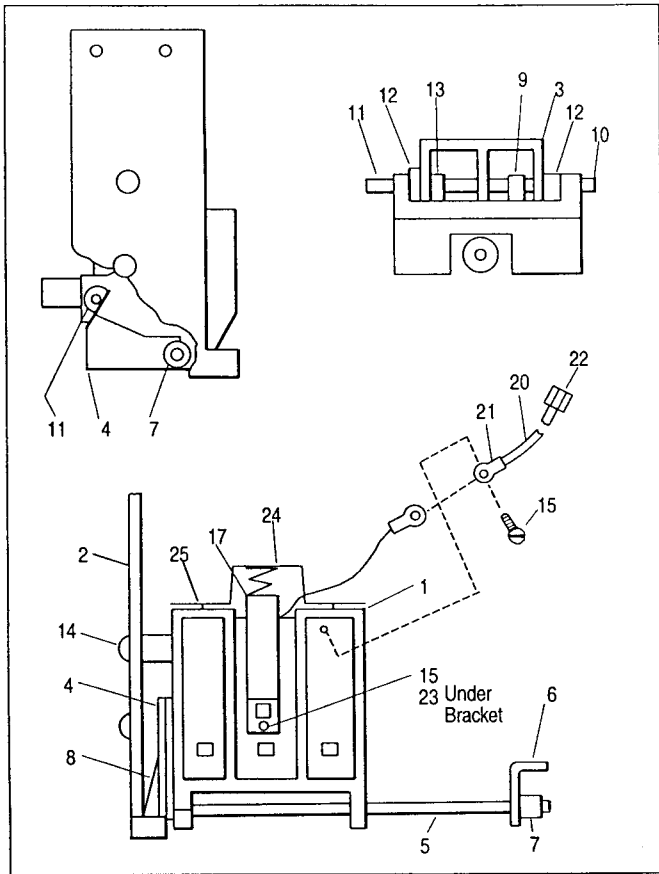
Blown Fuse Trip Assembly 18-399-805-501
